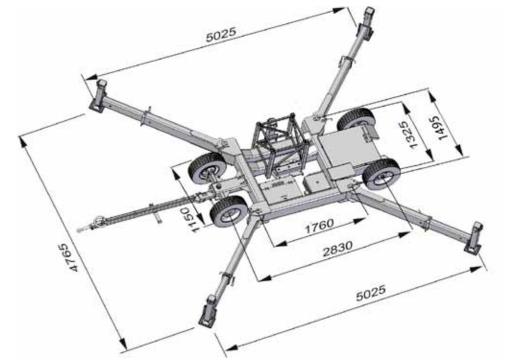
SC8000 on wheel chassis, main components
